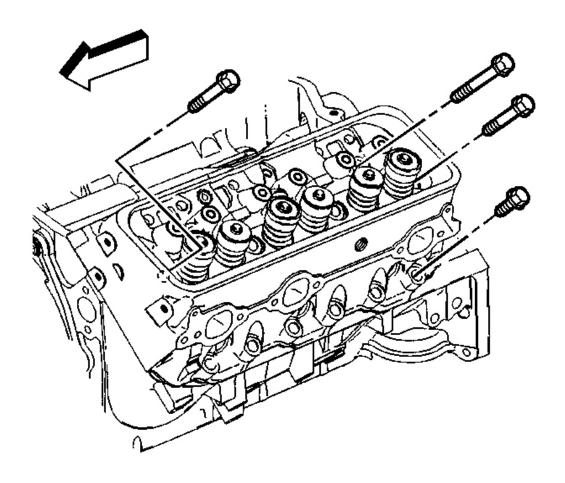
Locating Cylinder Head Bolts (Left) Courtesy of GENERAL MOTORS CORP.
